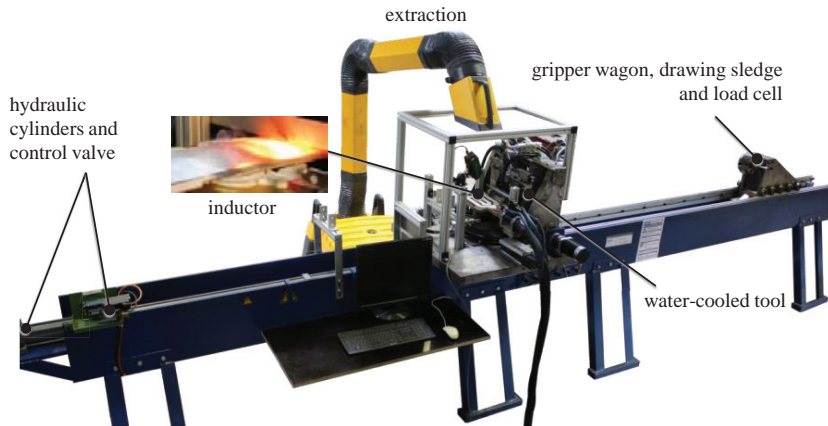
Draw bending application with integrated heat treatment at the Institute of Forming Technology and Machines (IFUM)
